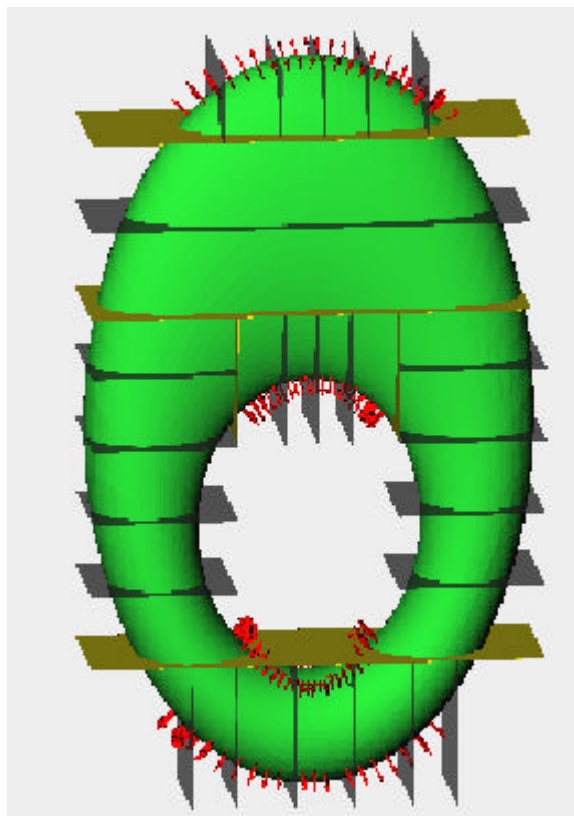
An example of decomposition of a CAD shape into segments and layers that can be manufactured
